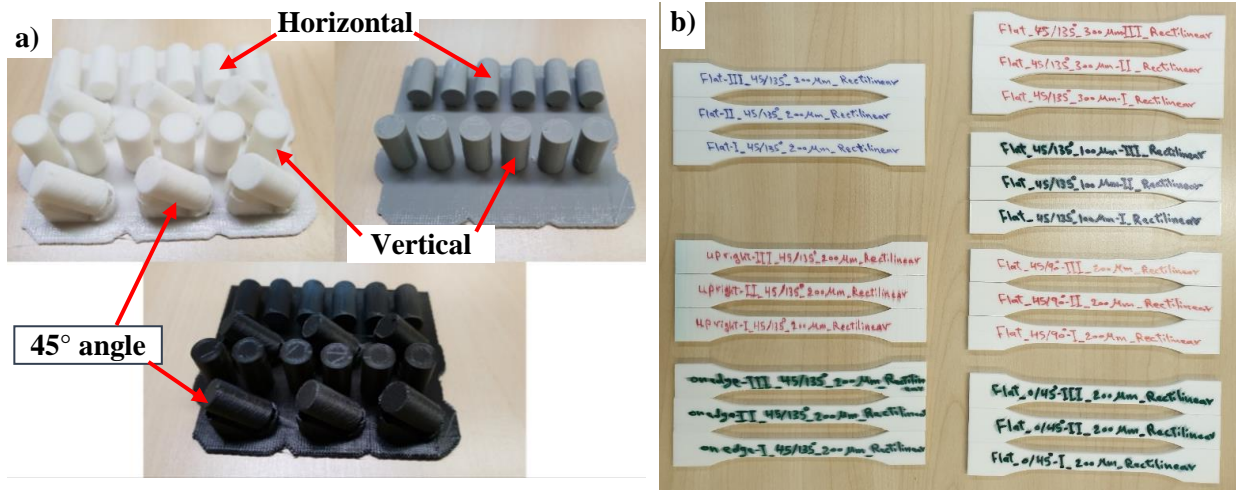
Physical appearance for the 3D-printed PLA samples, a) tribology test pieces manufactured in different orientations, and b) tensile specimens prior to the test
